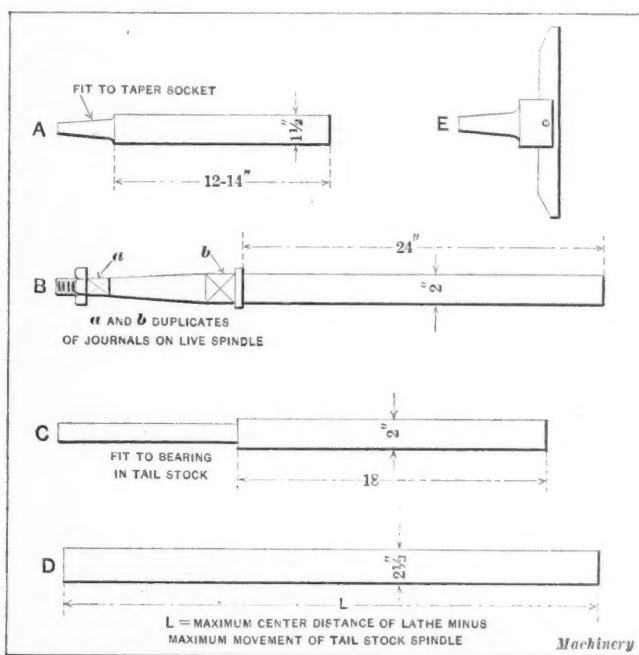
Different Forms of Test Bars used in making Alignment Tests on Lathes
